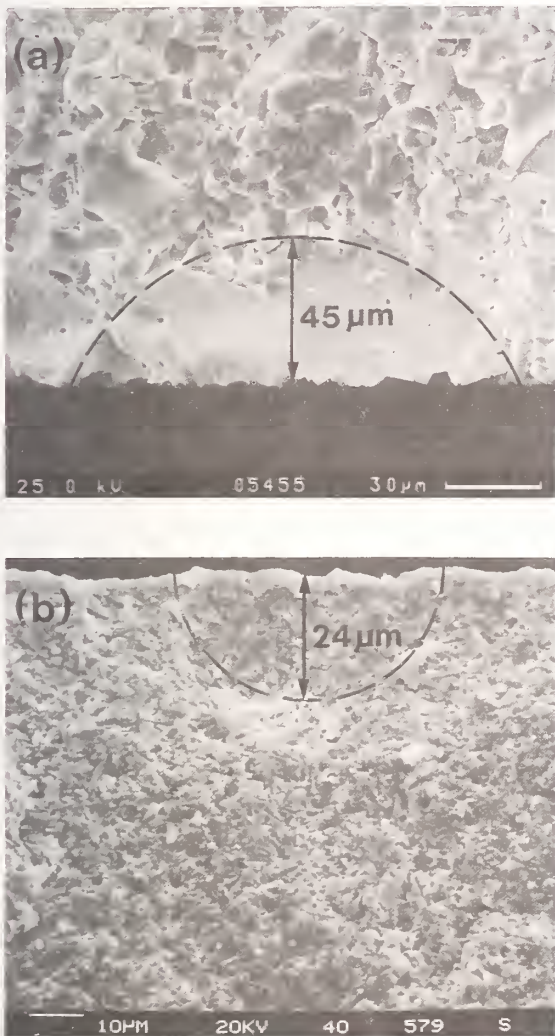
Micrographs of fracture surfaces with machining induced flaws of alumina (a) and silicon nitride (b). The flaw sizes are estimated on the basis of half-penny shaped cracks.
